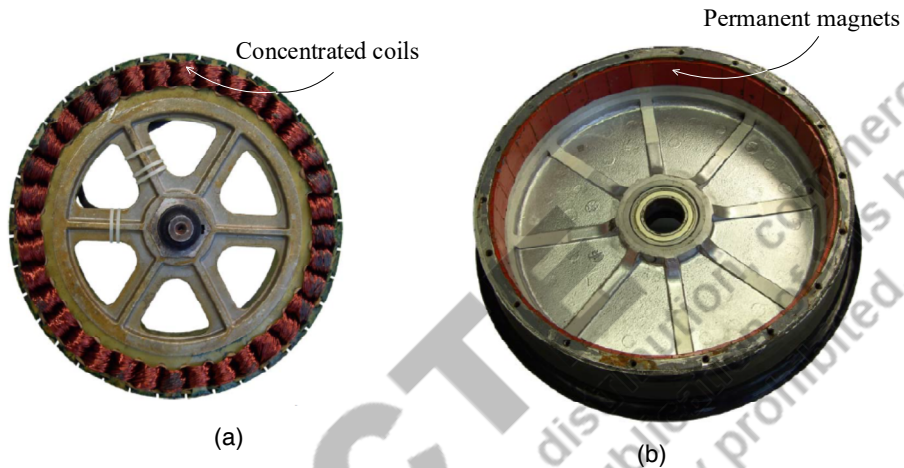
Hub motor (a) stator (inner part), (b) rotor (outer part)
